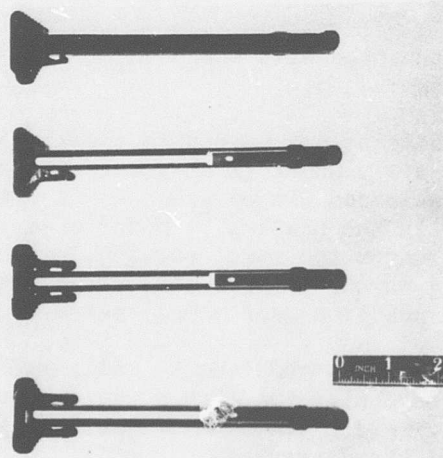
Charging Handle Assemblies, Upside Down View. Top to Bottom: Standard Aluminum Model; Redesigned Steel Model with One Latch; Redesigned Steel Model with Two Latches; Redesigned Steel Model with Two Latches and Elongated Carrier Key Channel. Note Length of Channel Compared to Latch Pivot Pins and Bevel at Rear of Channel.
